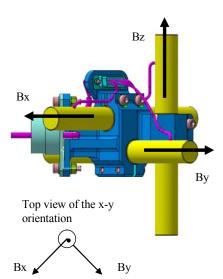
SCM-Sensor Interface drawing and magnetic measurement axis
